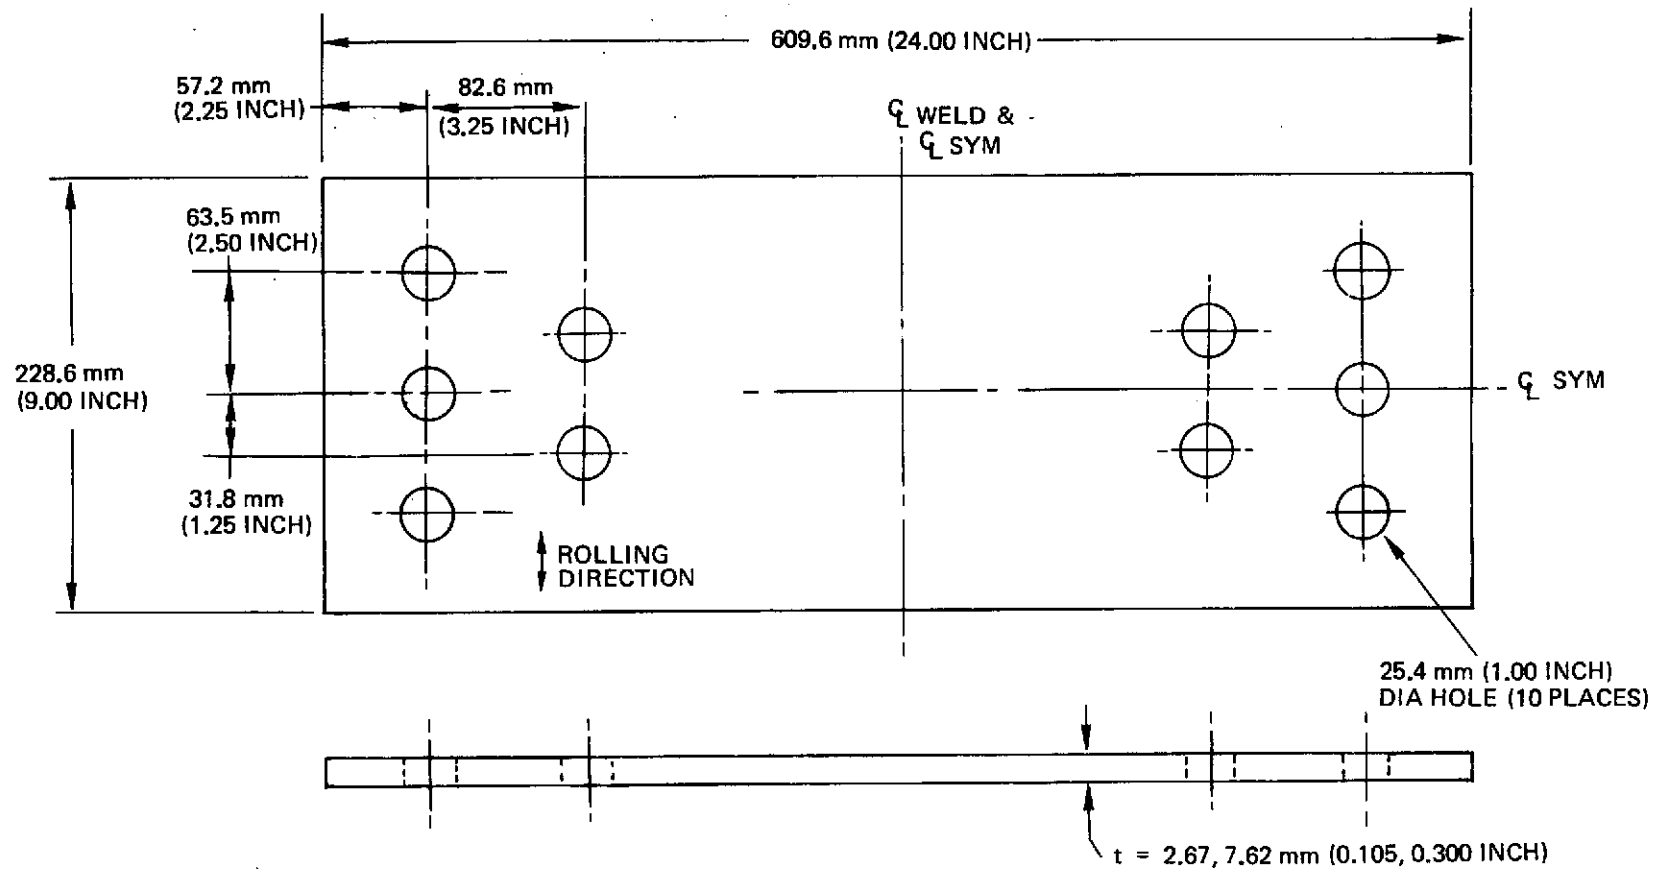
228.6 mm (9.00 INCH) WIDE 2219-T87 ALUMINUM ALLOY WELDMENT SPECIMEN
